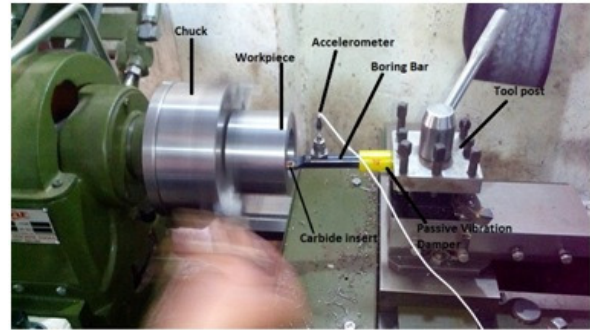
Installation of boring bar with passive damper and accelerometer on lathe machine
